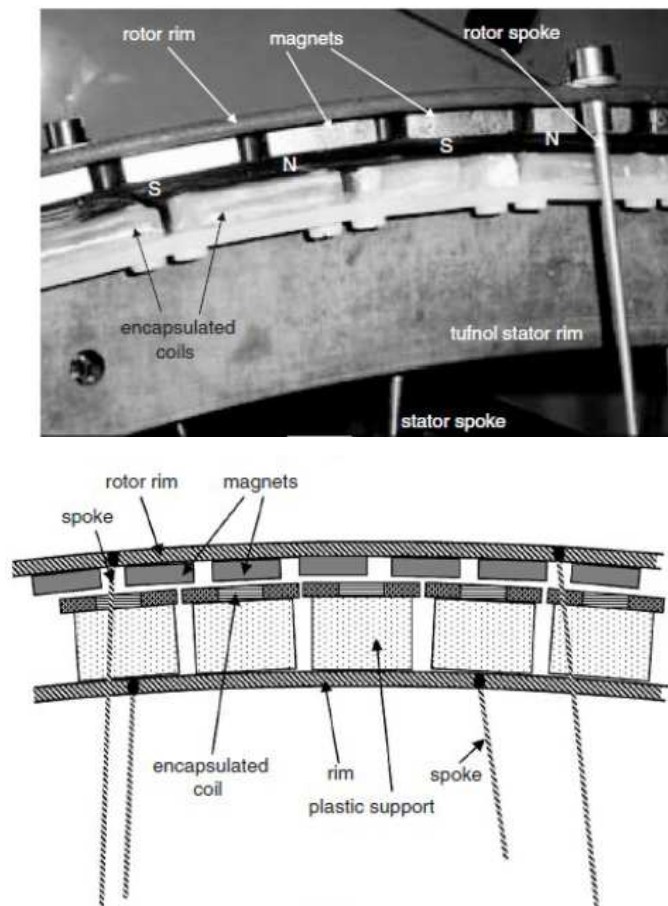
Radial flux air-cored machine with surface mounted permanent magnets [137]
